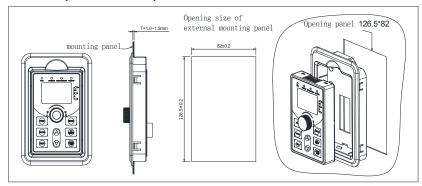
PI550-E keyboard installation open inlet dimension(mm)
